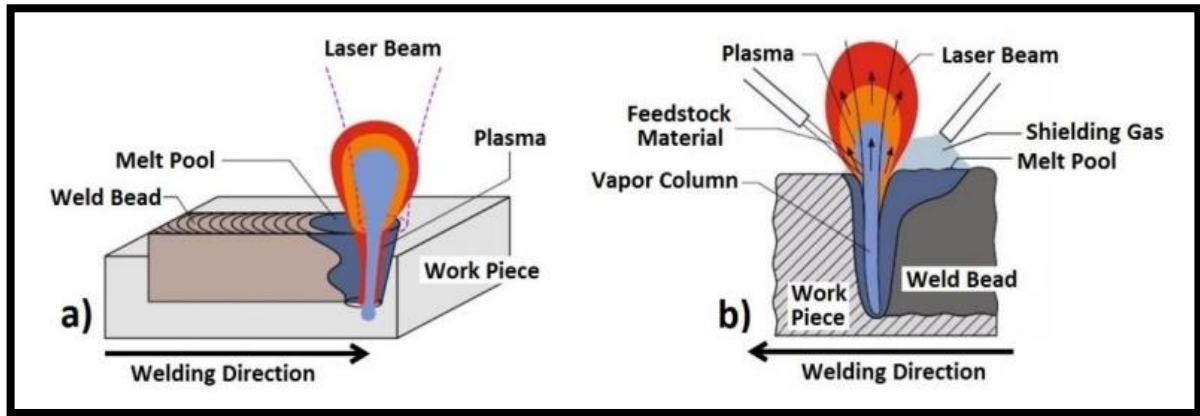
(a) Autogenous laser keyhole welding and (b) wire feed laser welding schematics[13].
